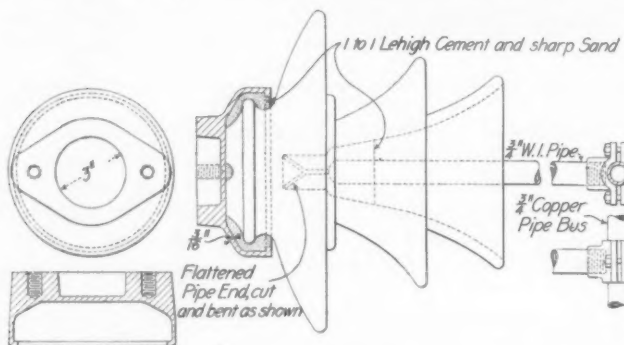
HIGH-TENSION BUSBAR INSULATOR
